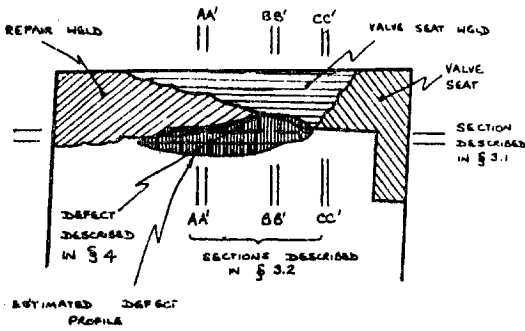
Estimated extent of the defect, of the repair weld and of the valve-seat weld.
